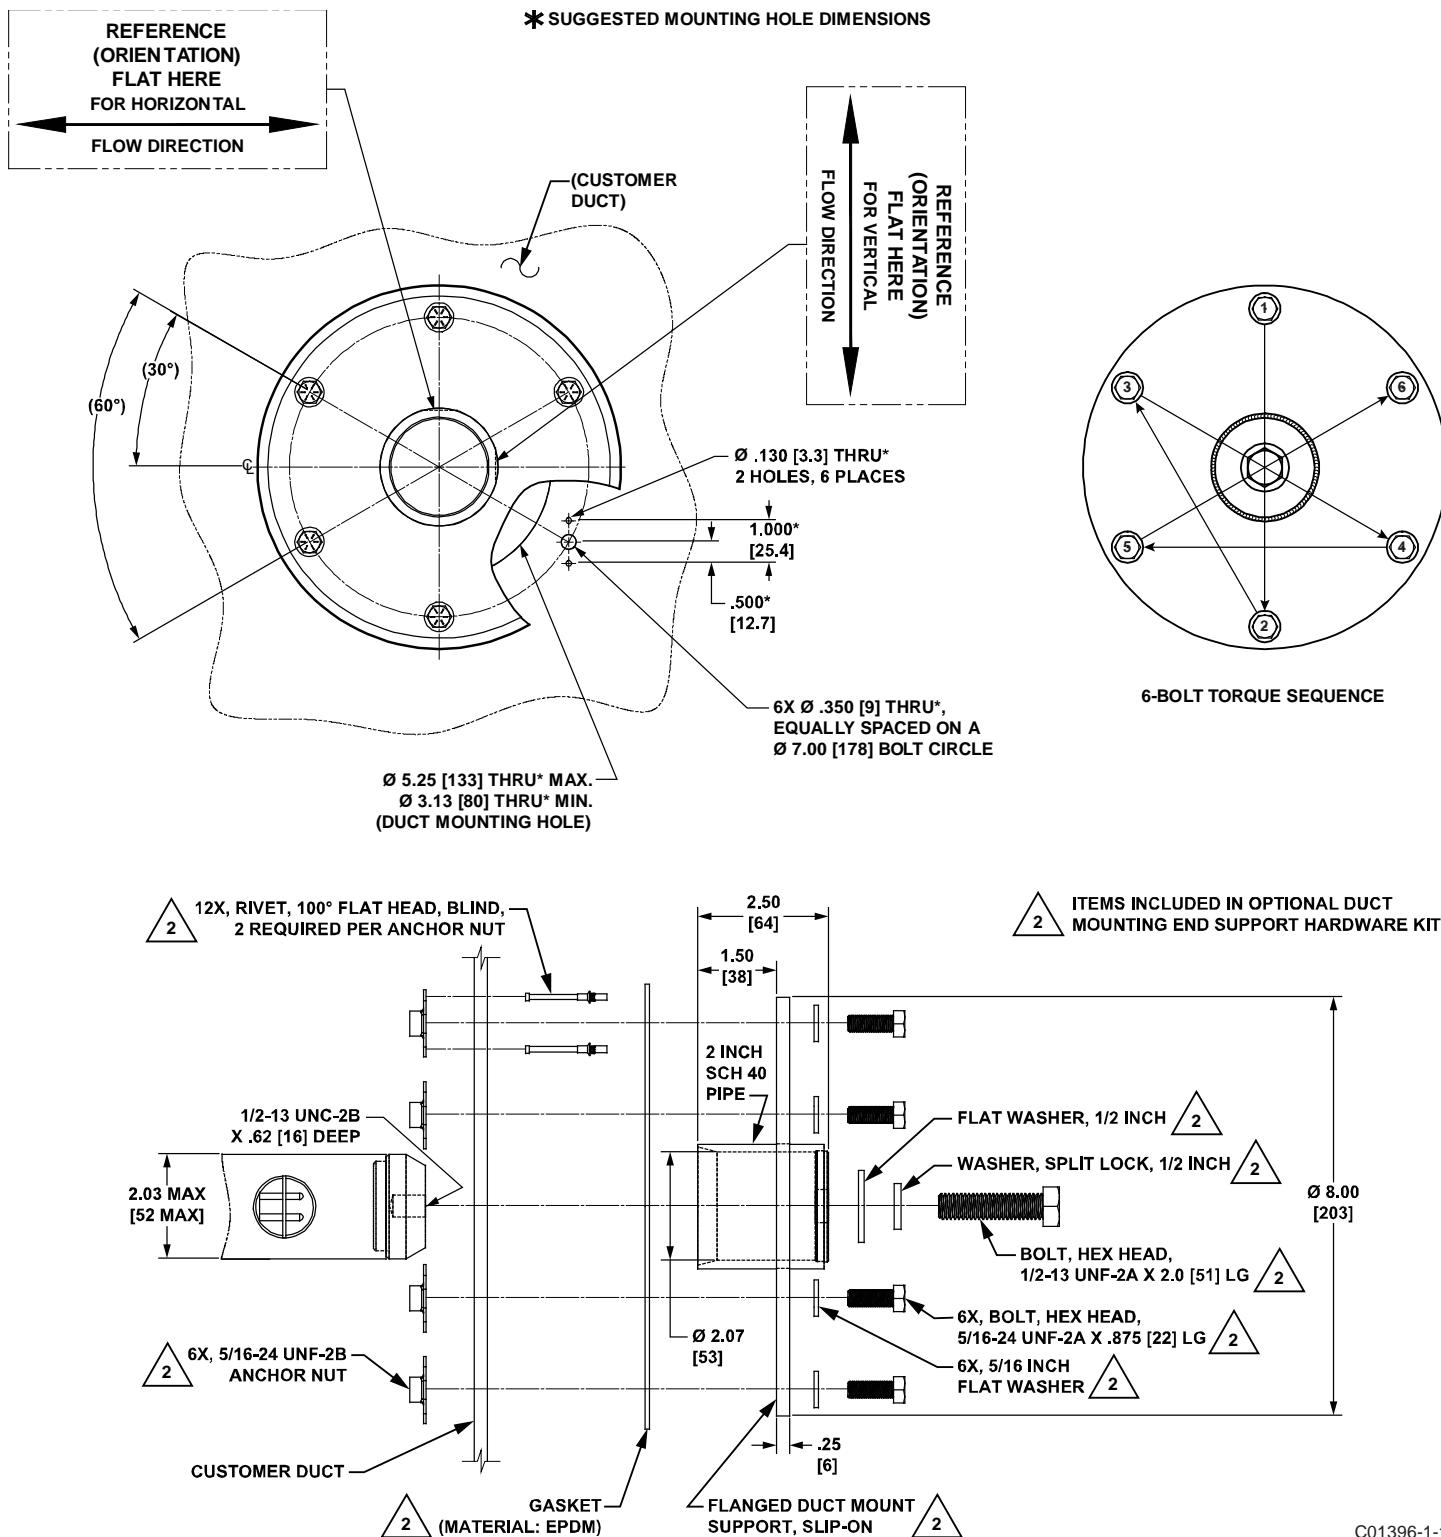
Duct Flange Mounting, End Support Hardware (Optional)
